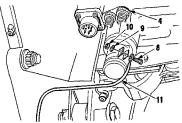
Primary Hydraulic Lines Removal/Installation and Connector P224 Detachment/Attachment
